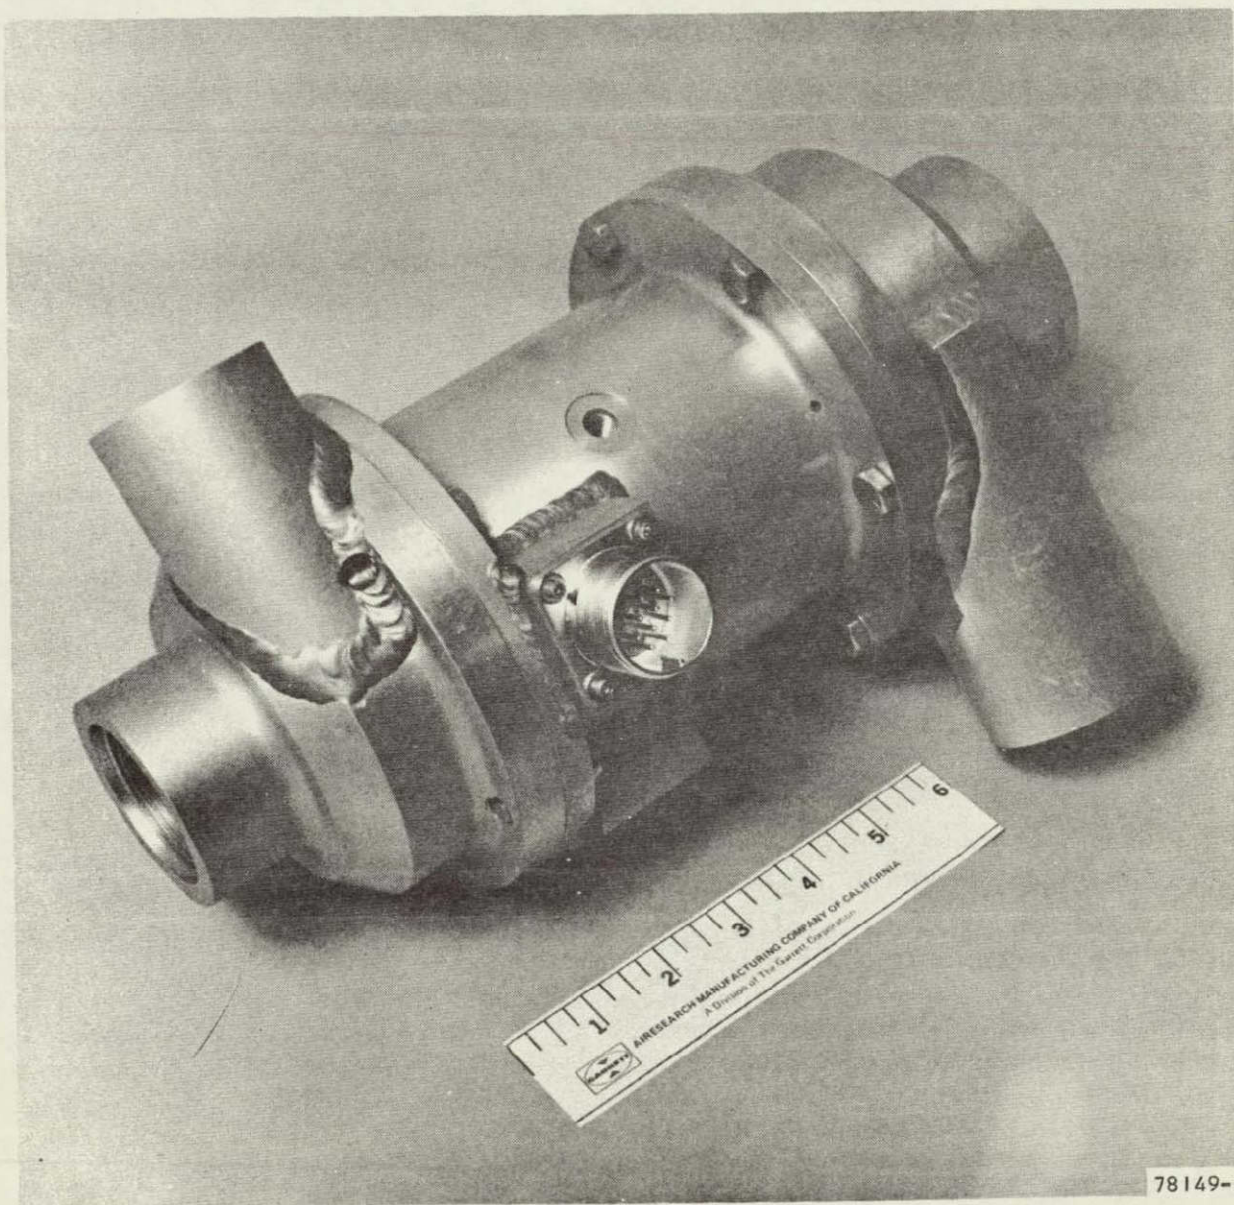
3-Ton Motor Driven Turbocompressor Housing
